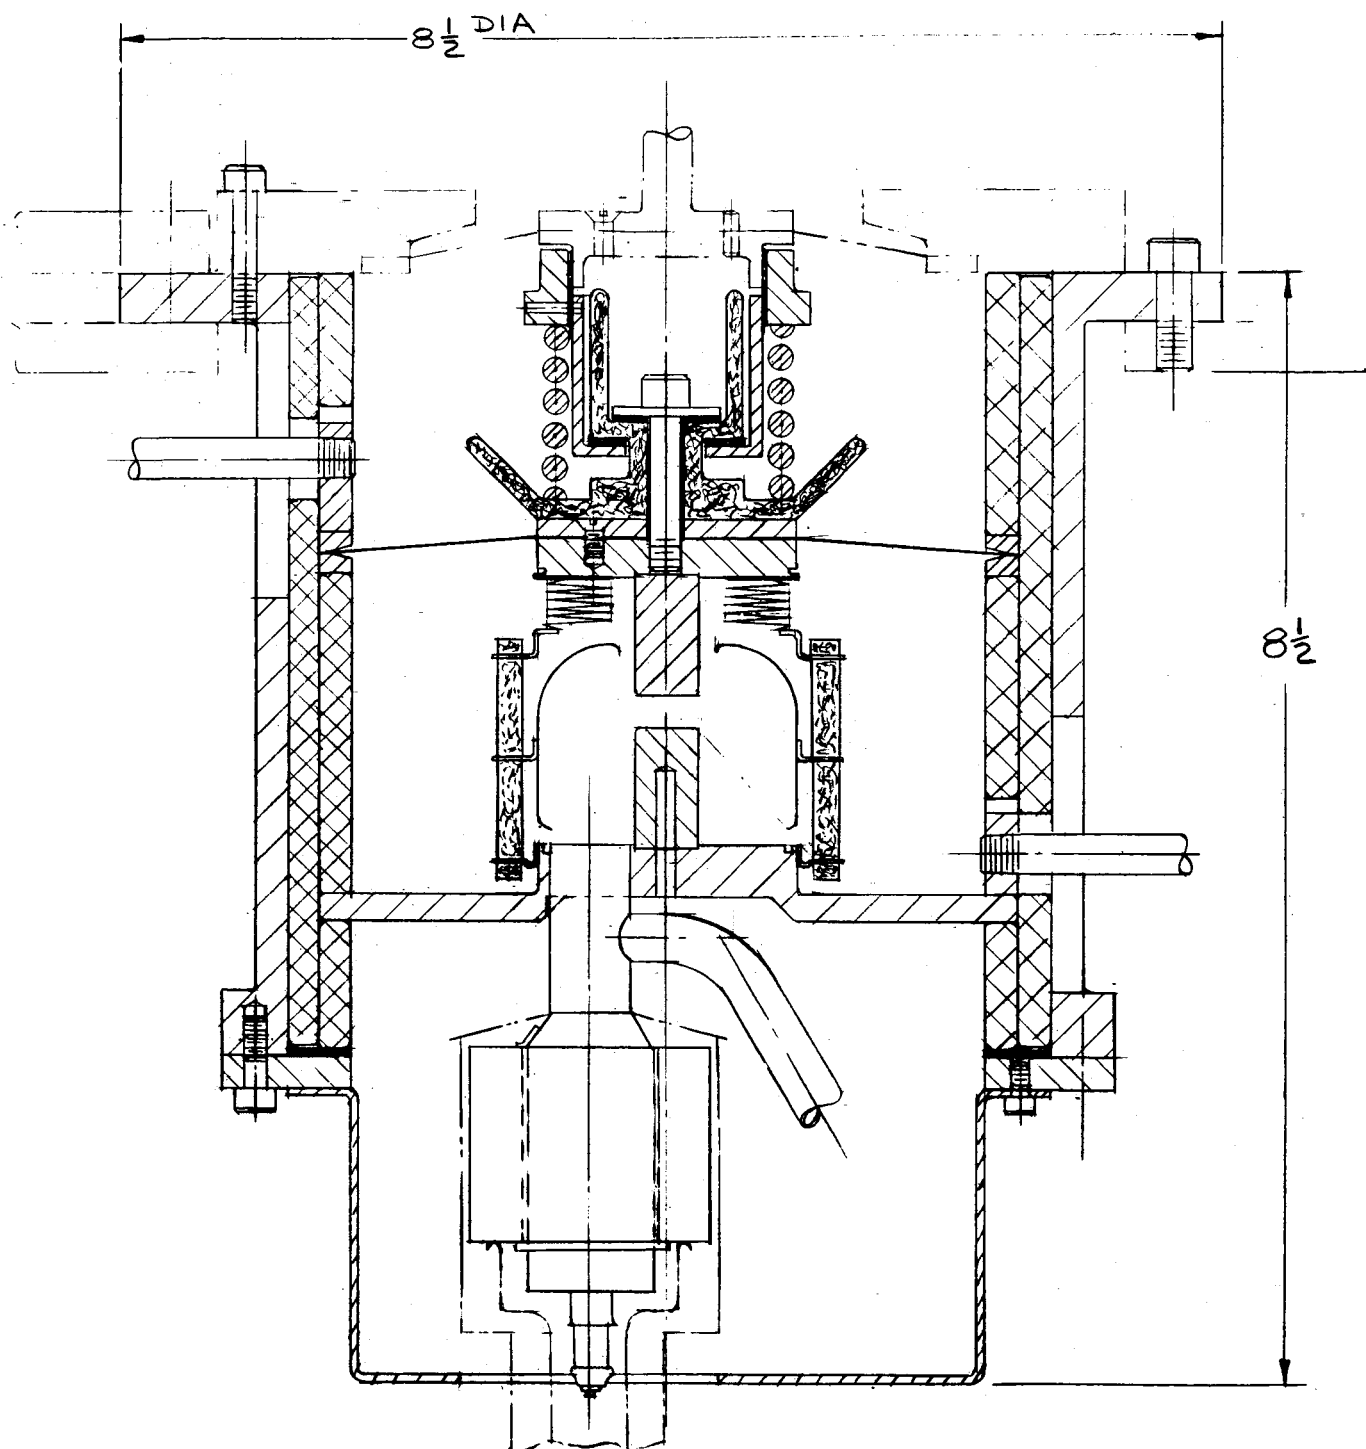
Design Concept for DC Engine Contactor Vacuum Interrupter.
